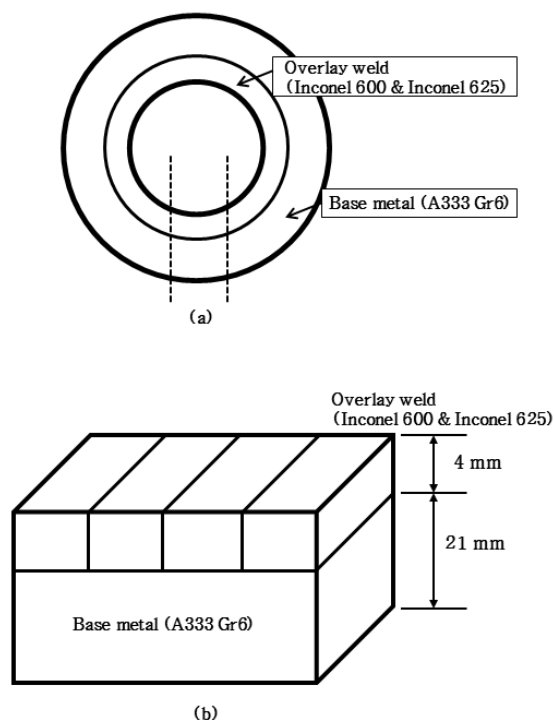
(a) Cross-sectional schematic diagram of Inconel 625 and Inconel 600 overlay-welded pipe. (b) Schematic diagram of the test sample.
